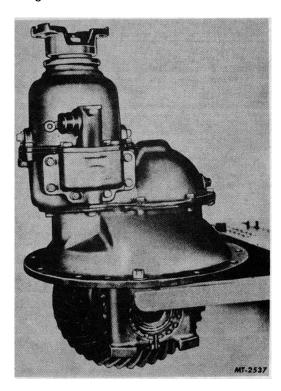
Power Divider and Differential Carrier Assembly Mounted In Rebuild Stand.
